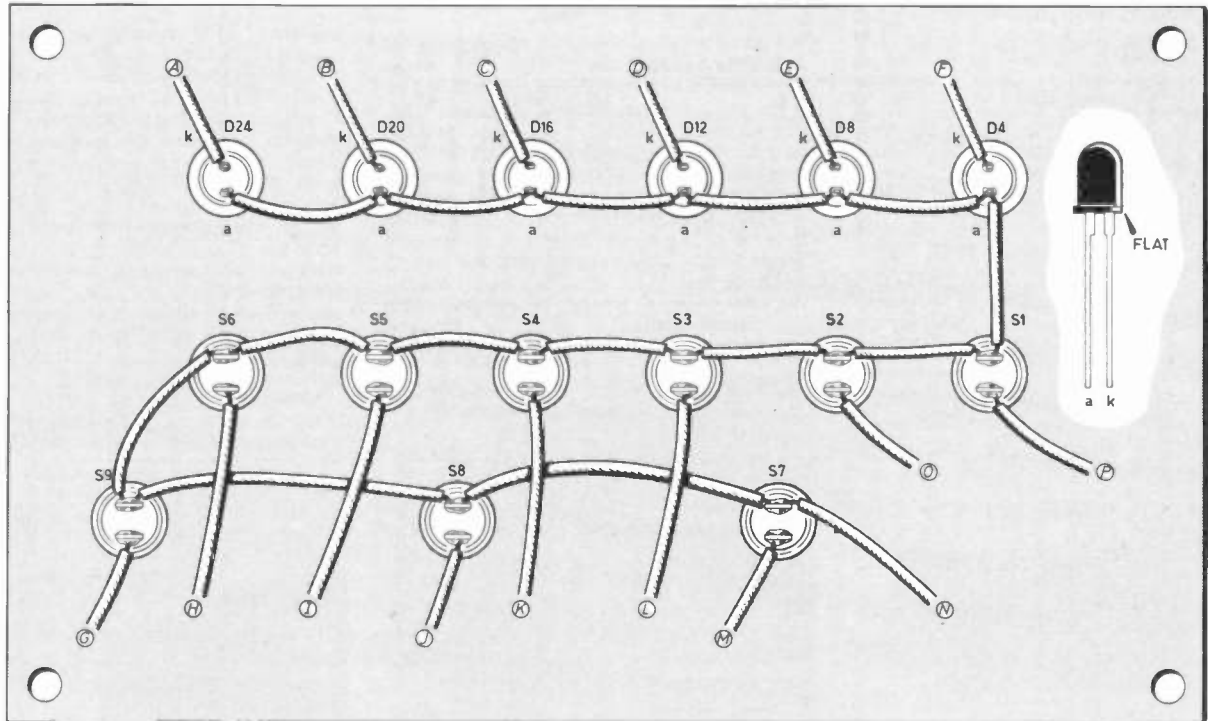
The layout and interwiring of the panel mounted switches and l.e.d.s.
